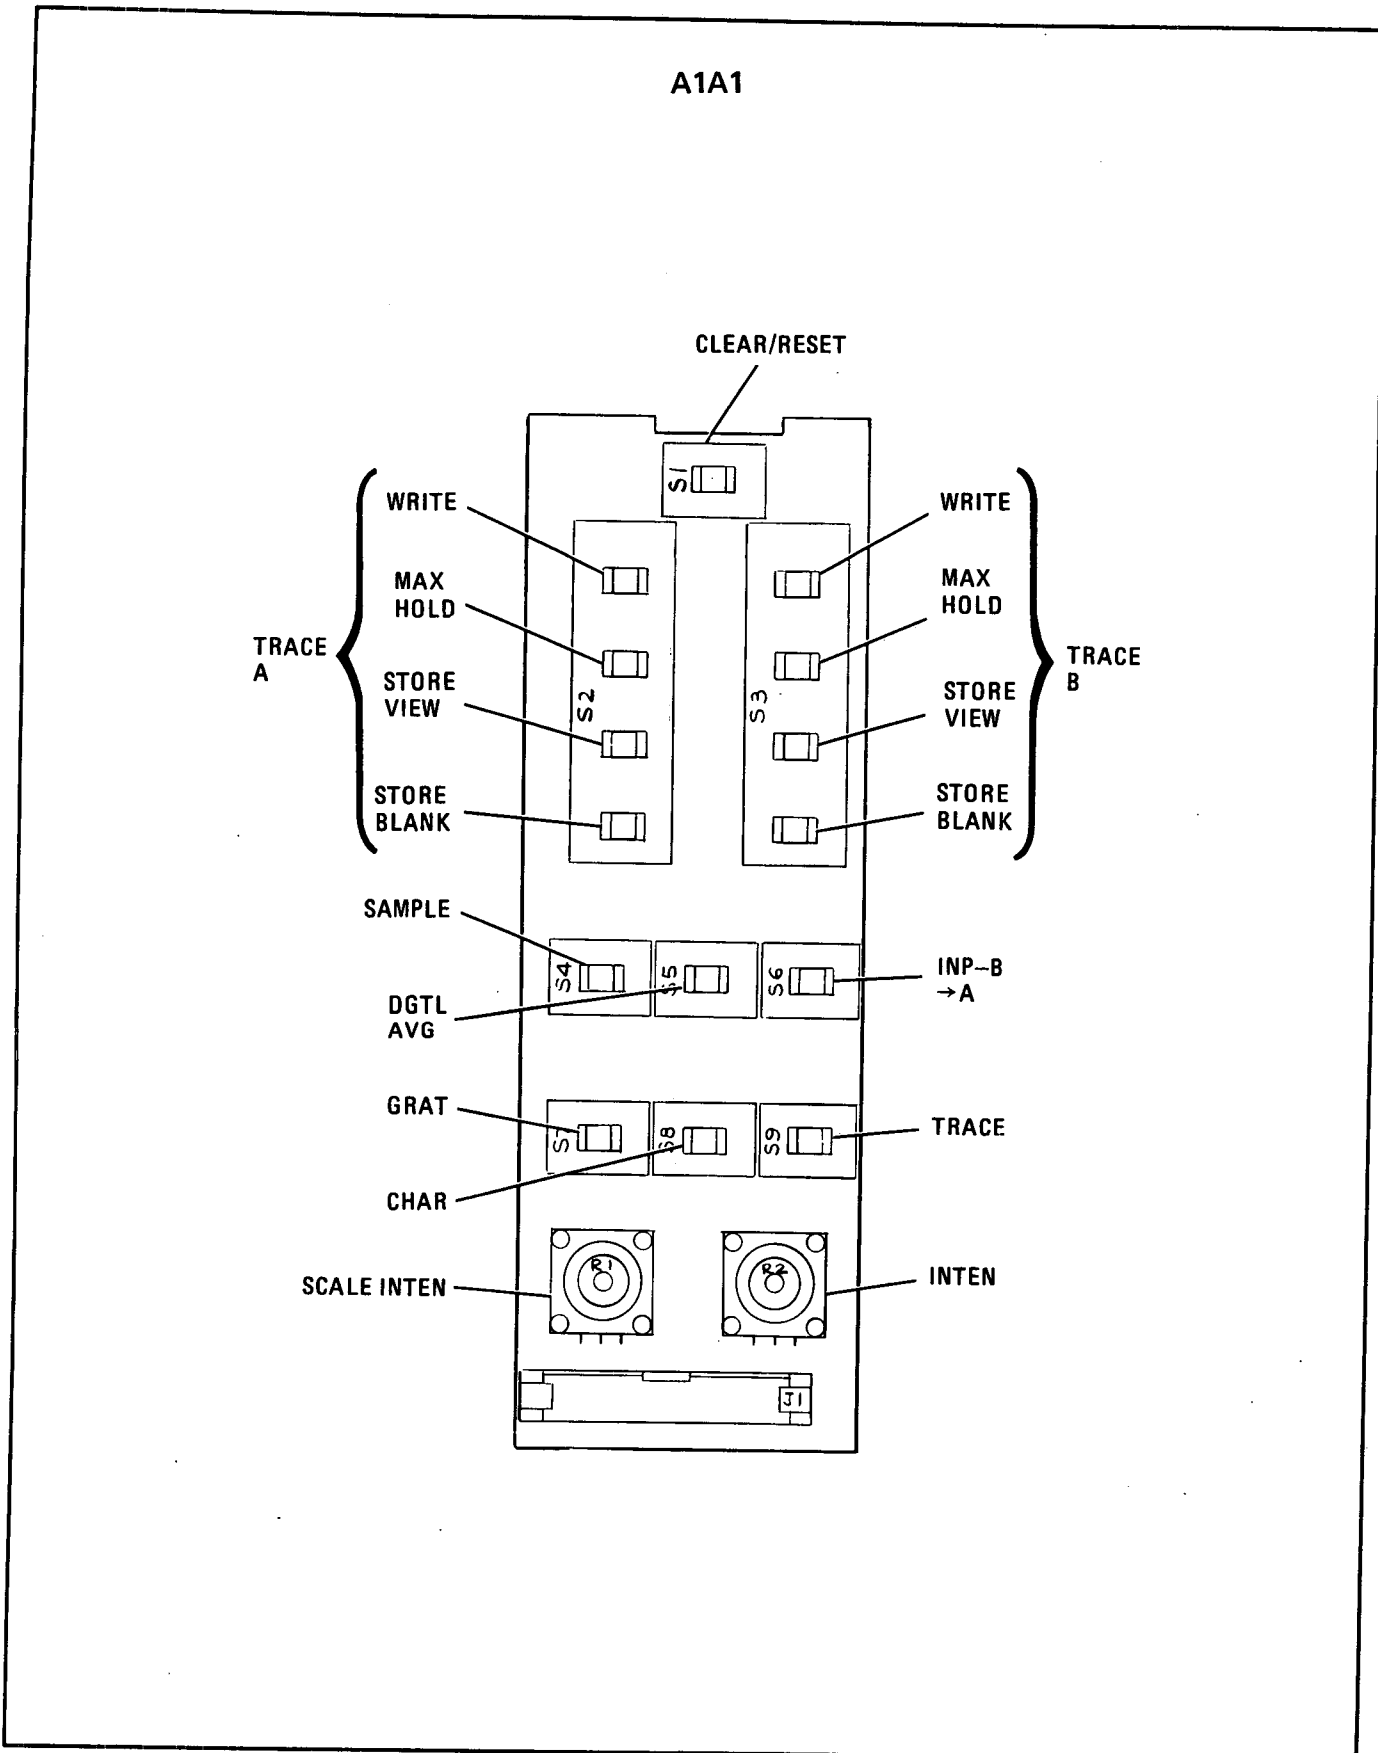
A1A1 Display Switch Assembly, Component Locations
